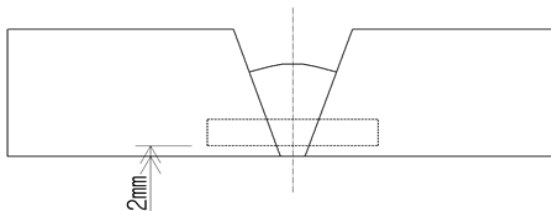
Collected location of specimen(welding metal) for impact test
